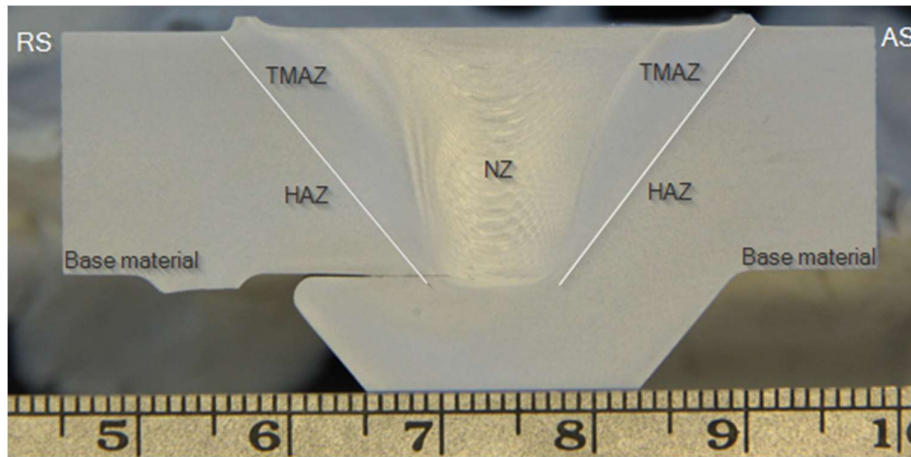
Defined view of 2_Gap_17mm weld
